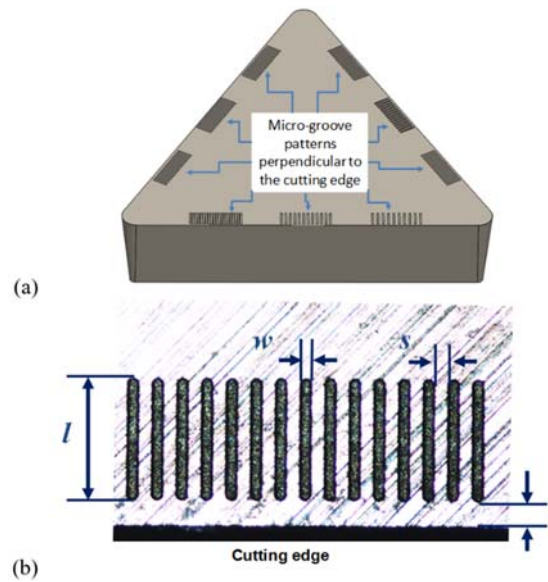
Layout of the micro-groove patterns on the cutting tool insert geometry (a), an optical microscopy image of a section of the micro-grooved tool as fabricated with micro-groove parameter definitions ($l = 500 \mu\text{m}$, $w = 50 \mu\text{m}$, $s = 50 \mu\text{m}$, $t = 100 \mu\text{m}$) (b).
